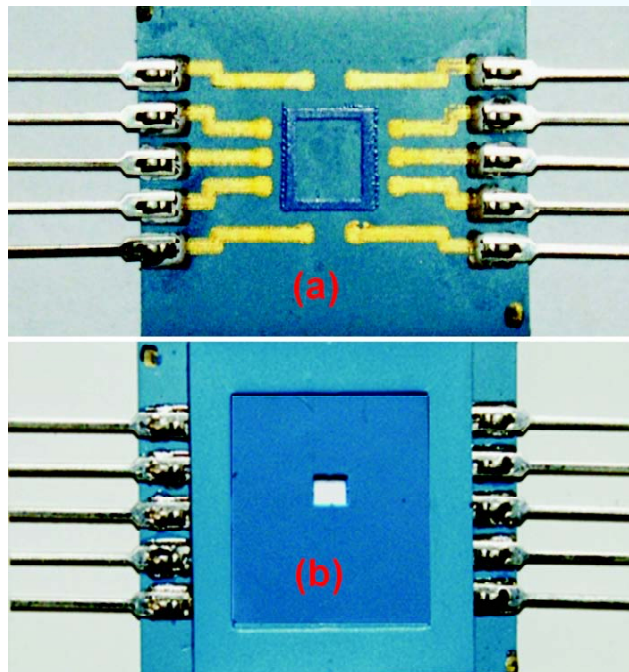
(a) LTCC base for Barometric Pressure Sensor (b) LTCC Package for Barometric Pressure Sensor
